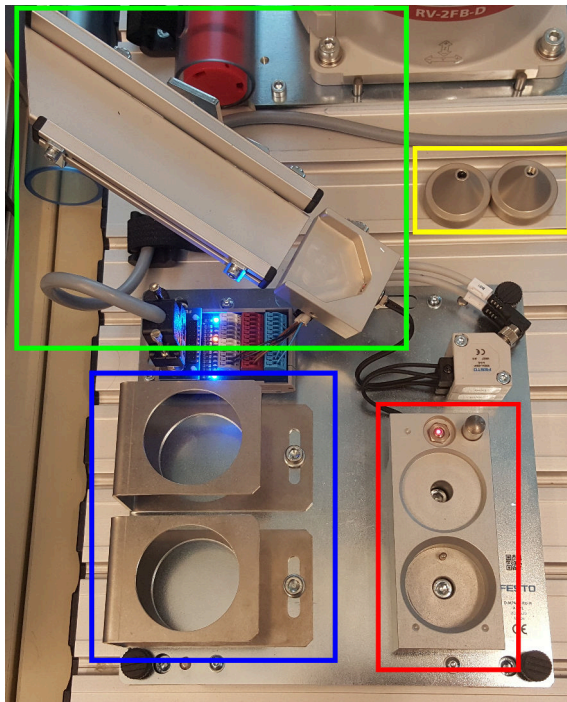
Robot handling module: Input chute, Calibration tool (mandrel), Sockets for buffers, Assembly socket
